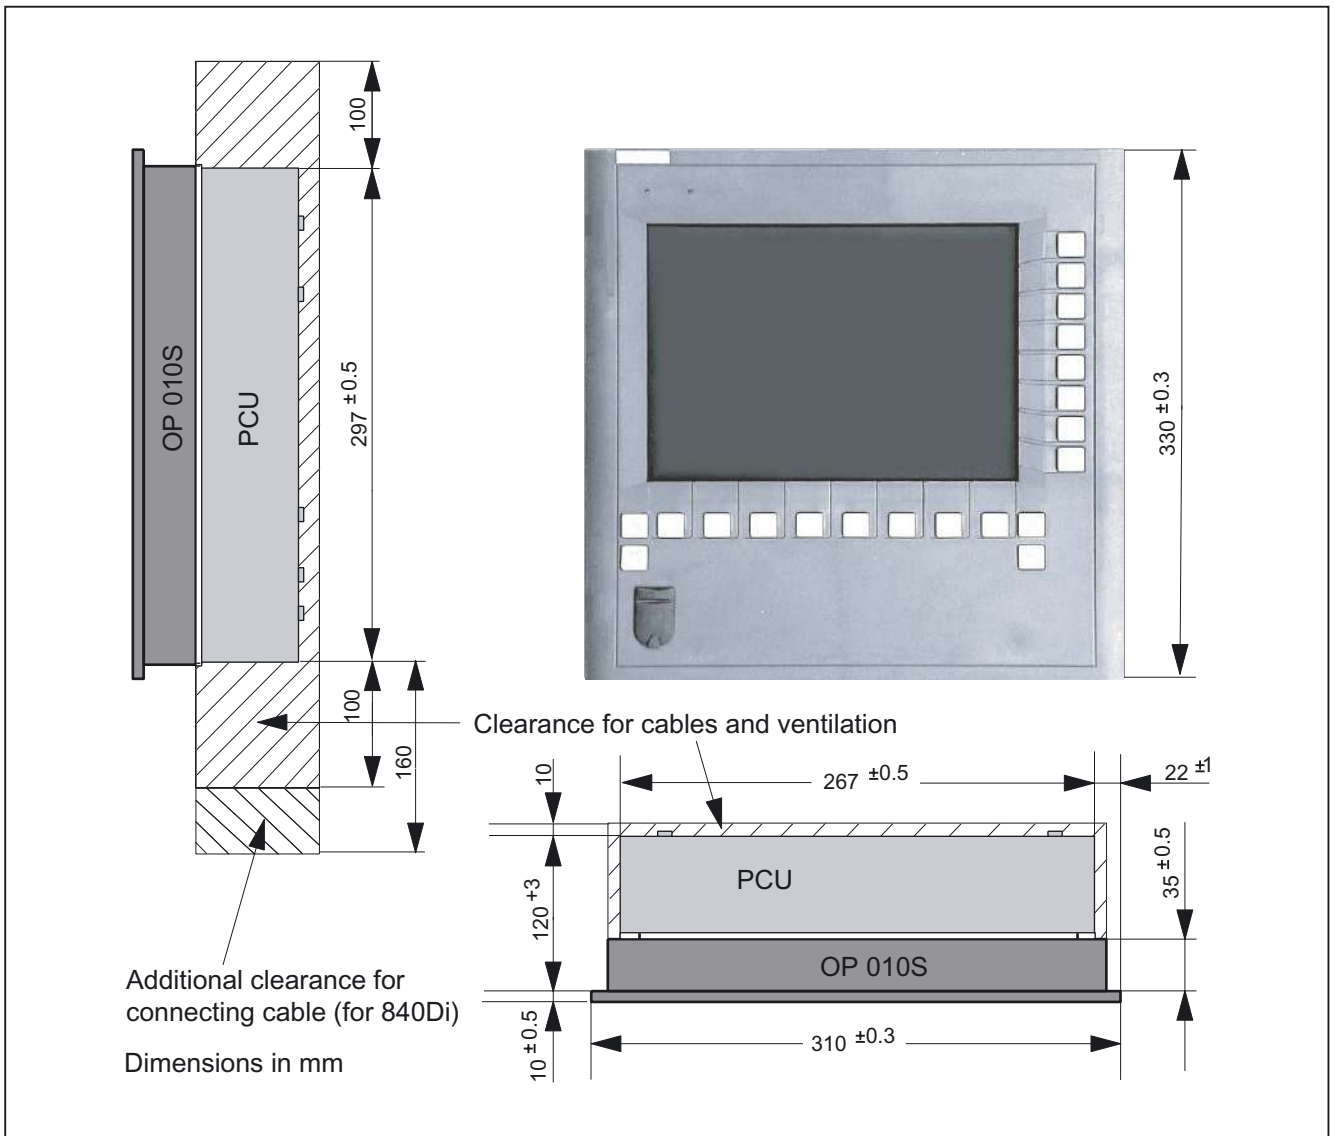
Mounting the PCU 50 to the OP 010S operator panel front with clearances
